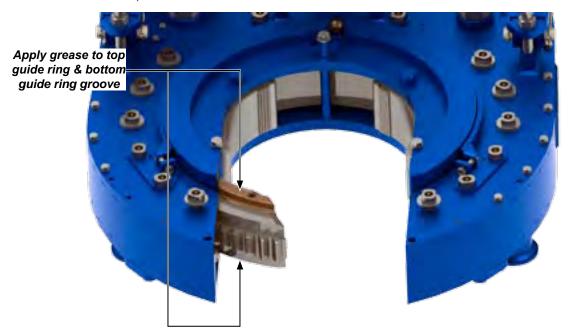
GUIDE RING LUBRICATION - KT13625 TONG
